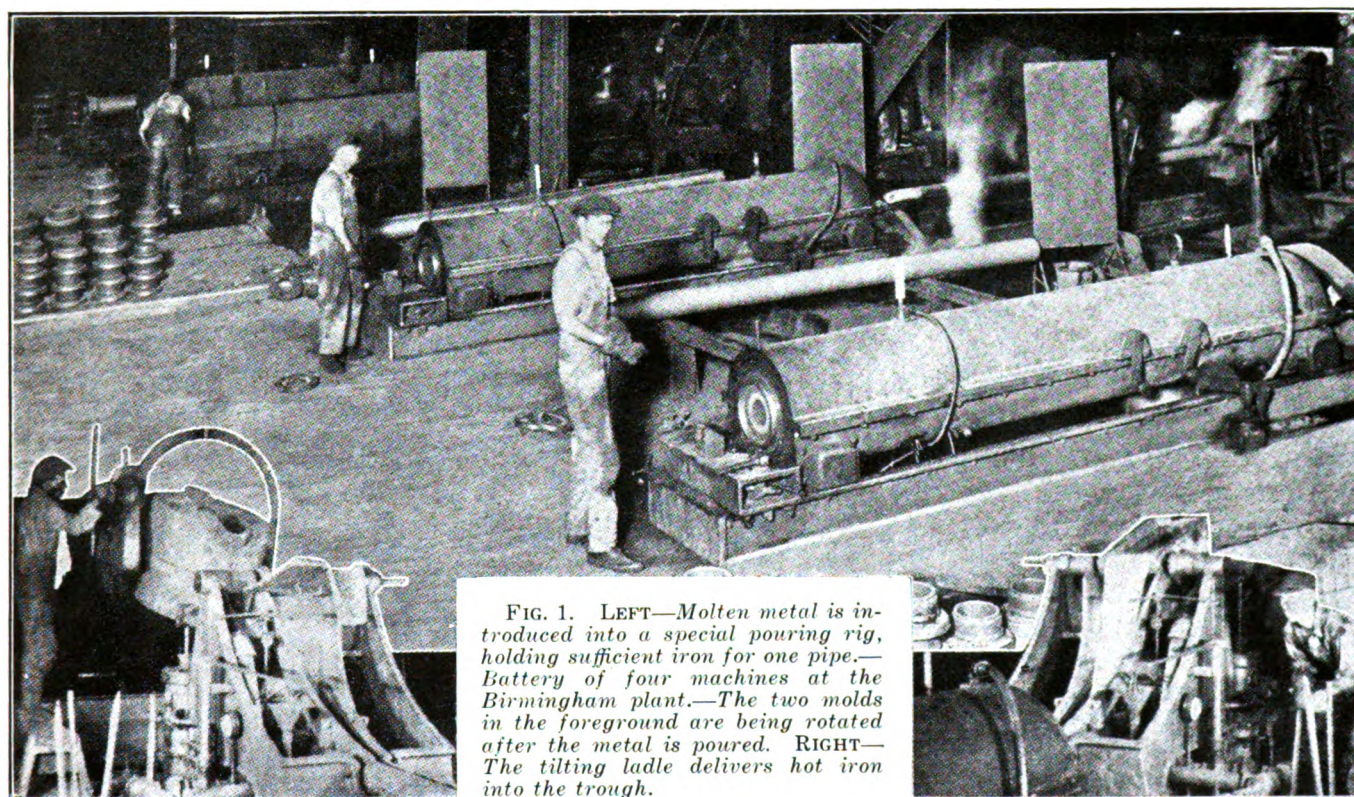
LEFT—Molten metal is introduced into a special pouring rig, holding sufficient iron for one pipe.—Battery of four machines at the Birmingham plant.—The two molds in the foreground are being rotated after the metal is poured. RIGHT—The tilting ladle delivers hot iron into the trough.
